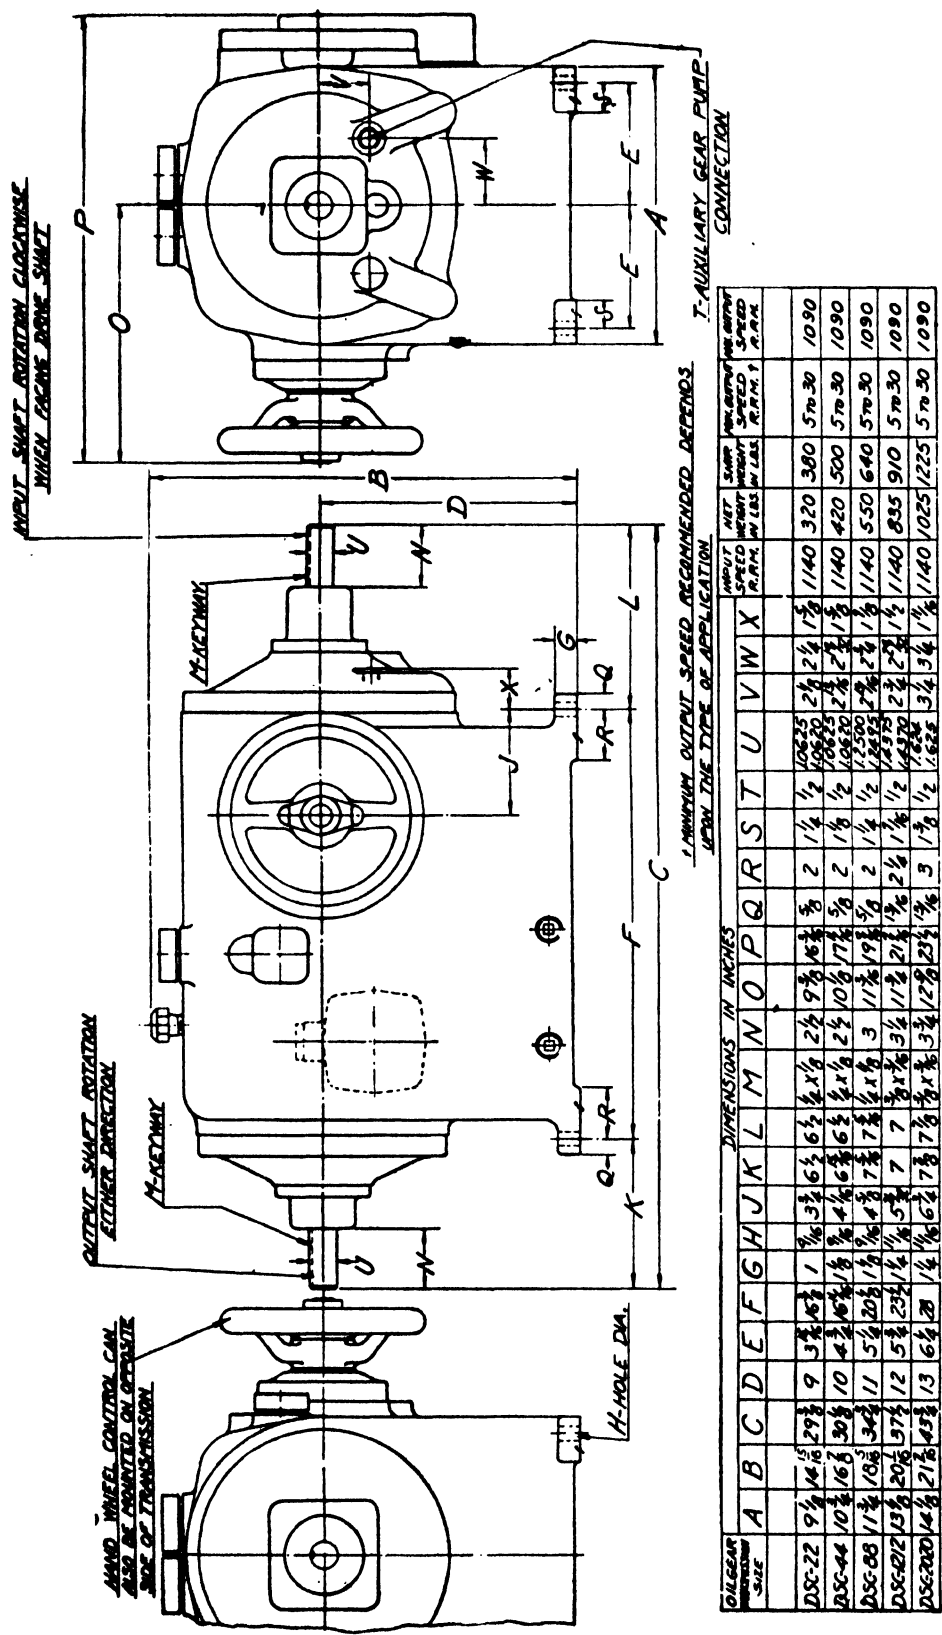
Dimensions of Type DSC transmissions. (The Oilgear Co., Milwaukee, Wis.)
